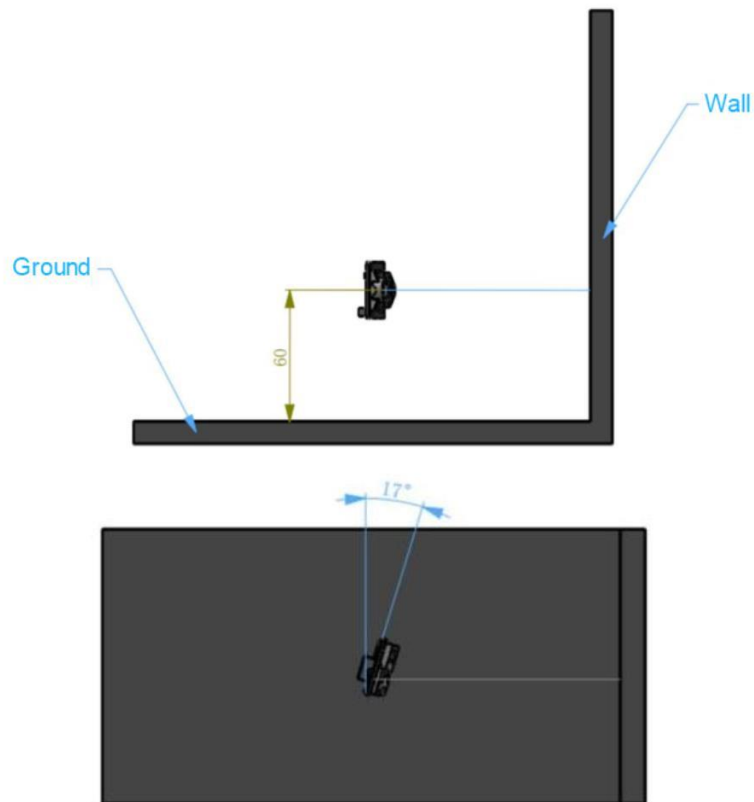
B GS2 EDGE REFERENCE INSTALLATION DRAWING (UNIT MM)
